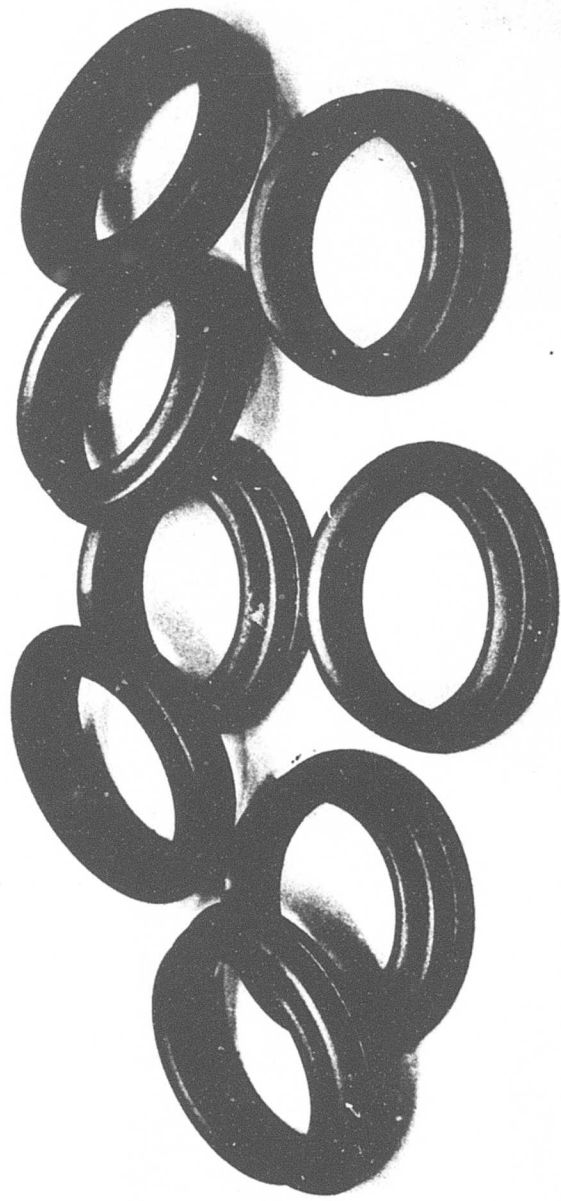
Semifinish Machined Ausforged Inner-ring Blanks
